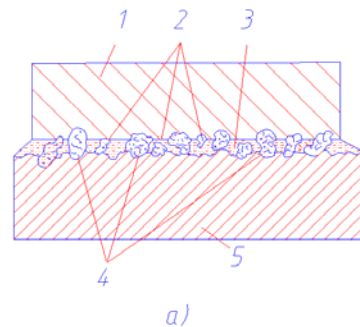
The smooth grinding with help of abrasives; 1- abrading tool; 2 – abrasive grains pieces; 3 – cutting emulsion; 4 – abrasive grains; 5 – work surface of the part
